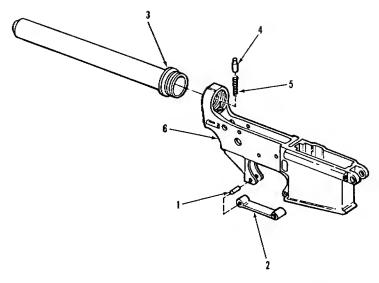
Lower receiver and extension subassembly 8448605 (M16) and 8448579 (M16A1)
